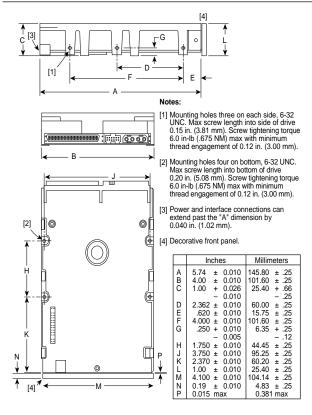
Hawk 1LP family W/WD model drive mounting dimensions (68 pin SCSI I/O connector)
